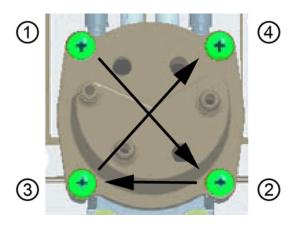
Star pattern to tighten reservoir fasteners. Tighten screws in the order indicated.
